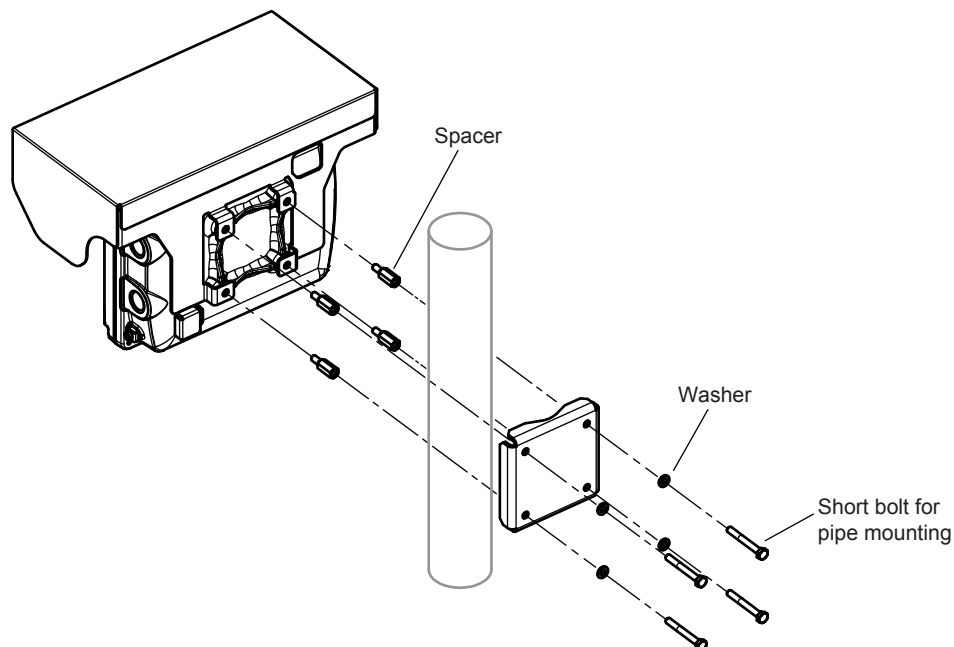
Pipe mounting when a sun shield is used (vertical mounting example)
